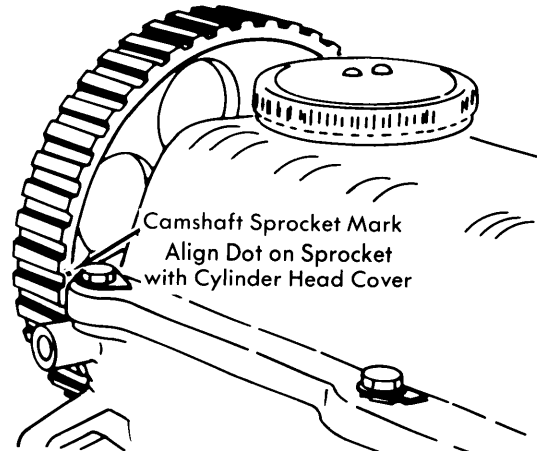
Index Mark on Camshaft Sprocket Aligned with Cylinder Head Cover
